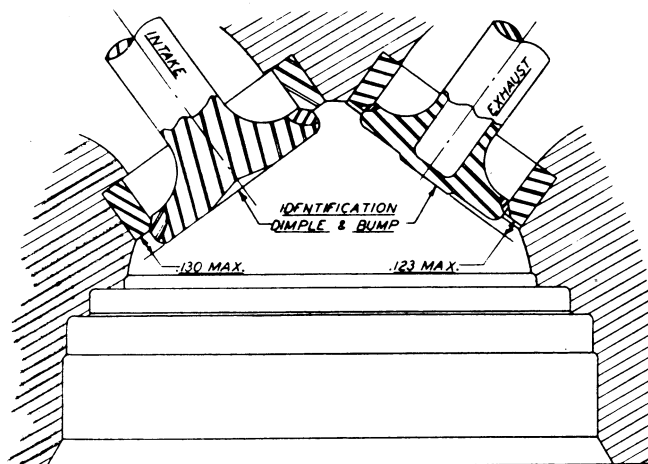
PROPER VALVE SEATING IN NEW CYLINDER HEAD
